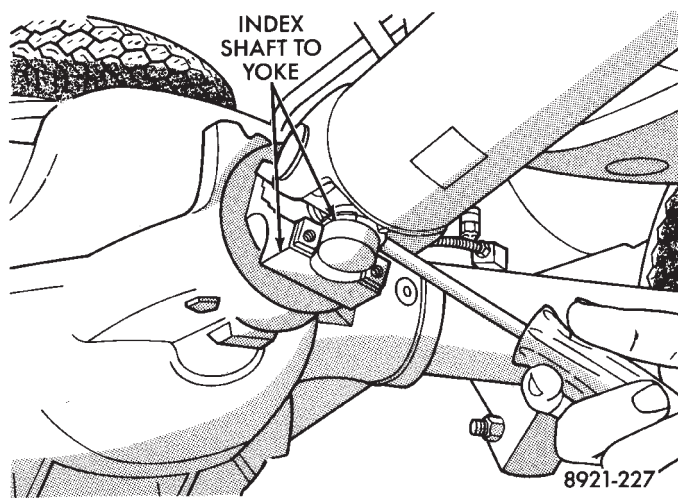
Marking Propeller Shaft And Yoke For Alignment Reference
